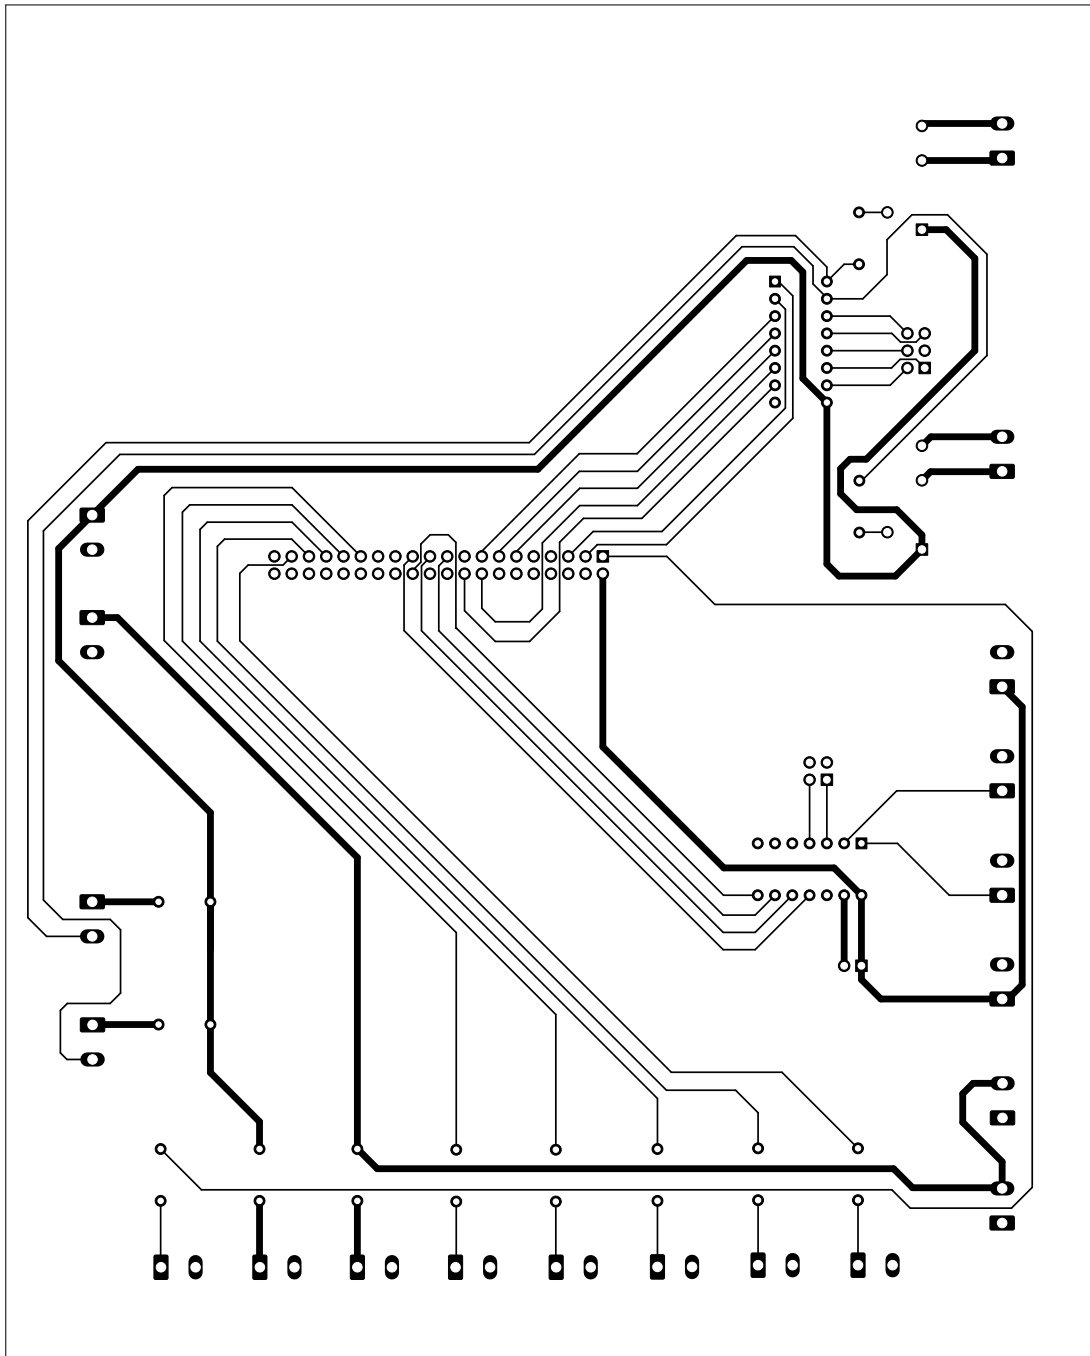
Front copper layer. Tracks and elements' footprints are drawn here. Top view on the PCB
